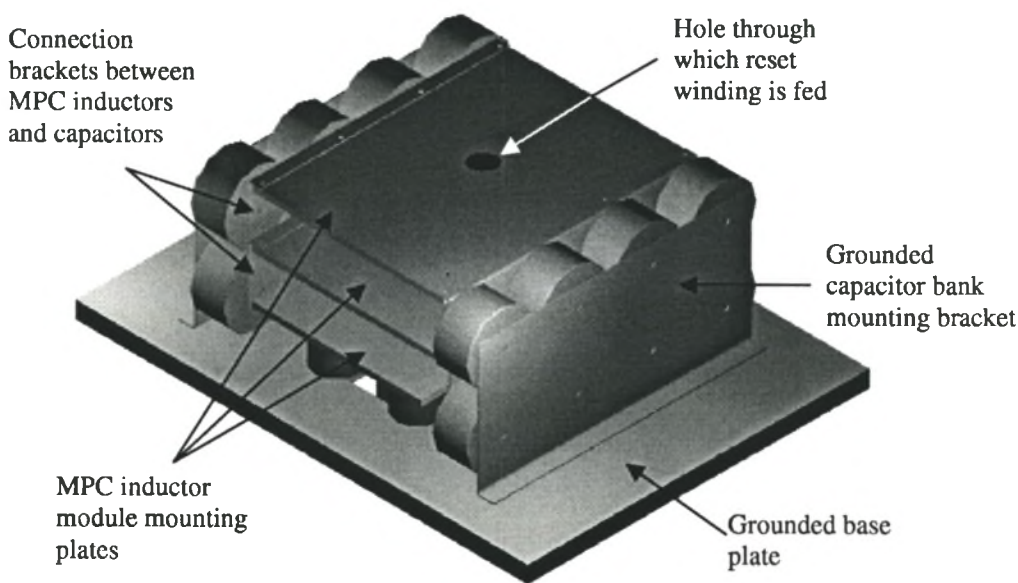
Three-dimensional model of complete MPC unit assembly (elevated view).
